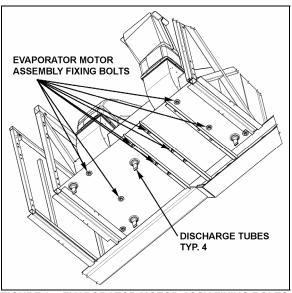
EVAPORATOR MOTOR ASSY FIXING BOLTS
